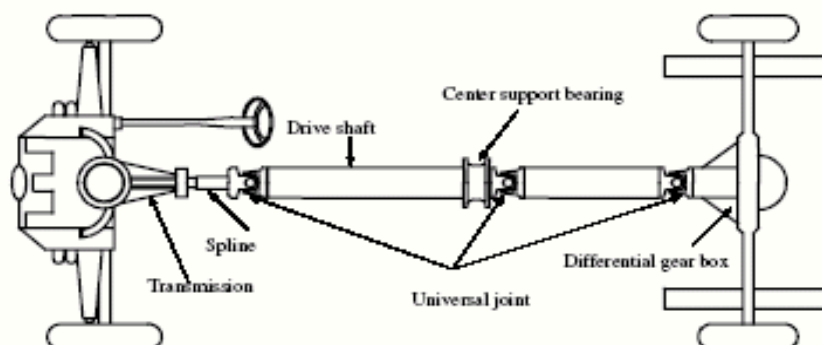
Conventional two-piece drive shaft arrangement for rear wheel vehicle driving system
